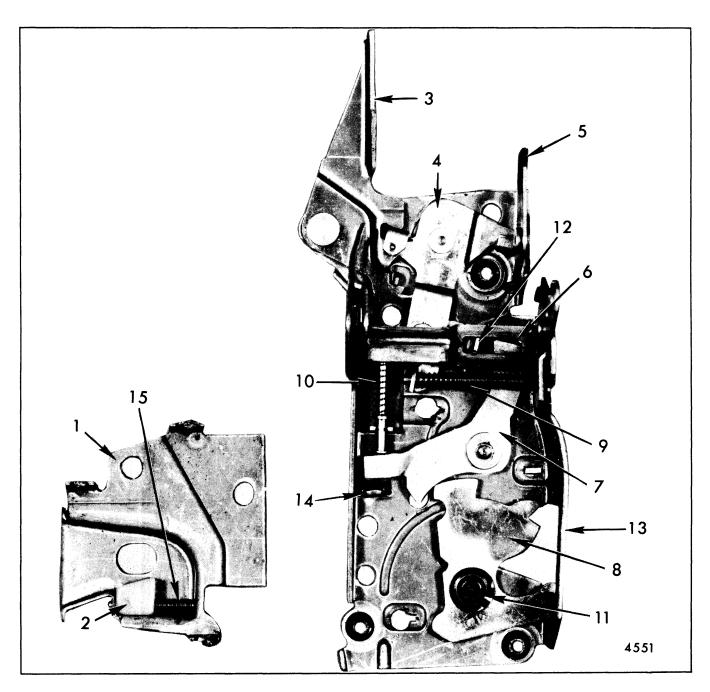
Front Door Lock Assembly - "A, B, C and E" Styles
